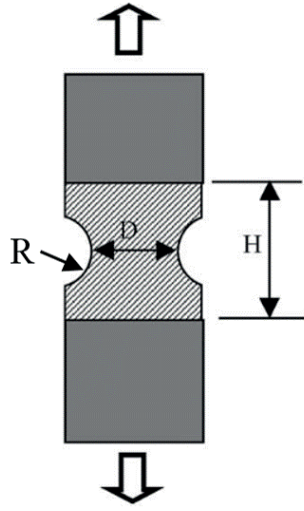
Axisymmetrical notched cross weld tensile specimen
